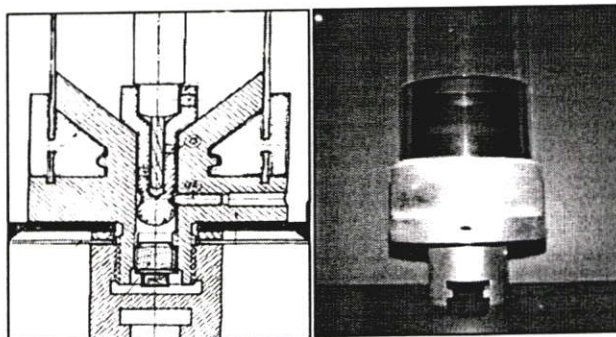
The joint between the acrylic tube and the cylindrical aluminium at the inner part of the connector
